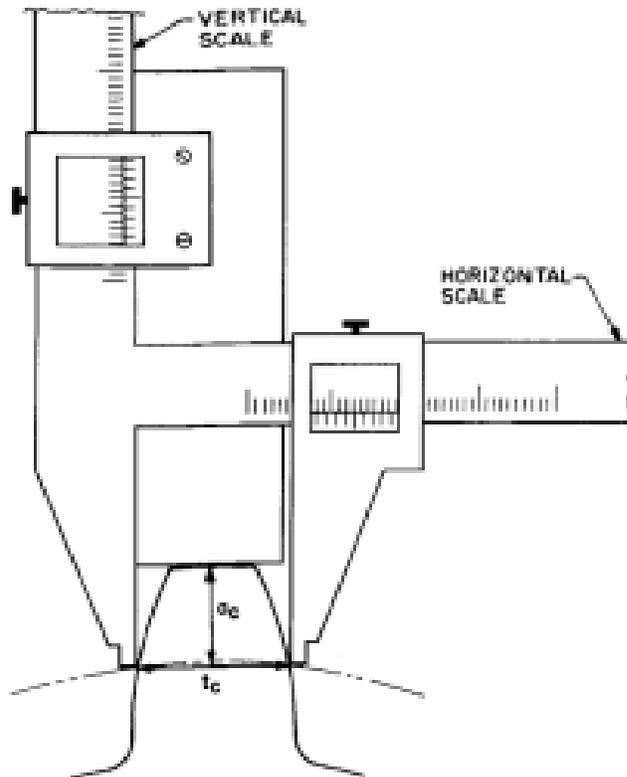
Vernier tooth caliper
